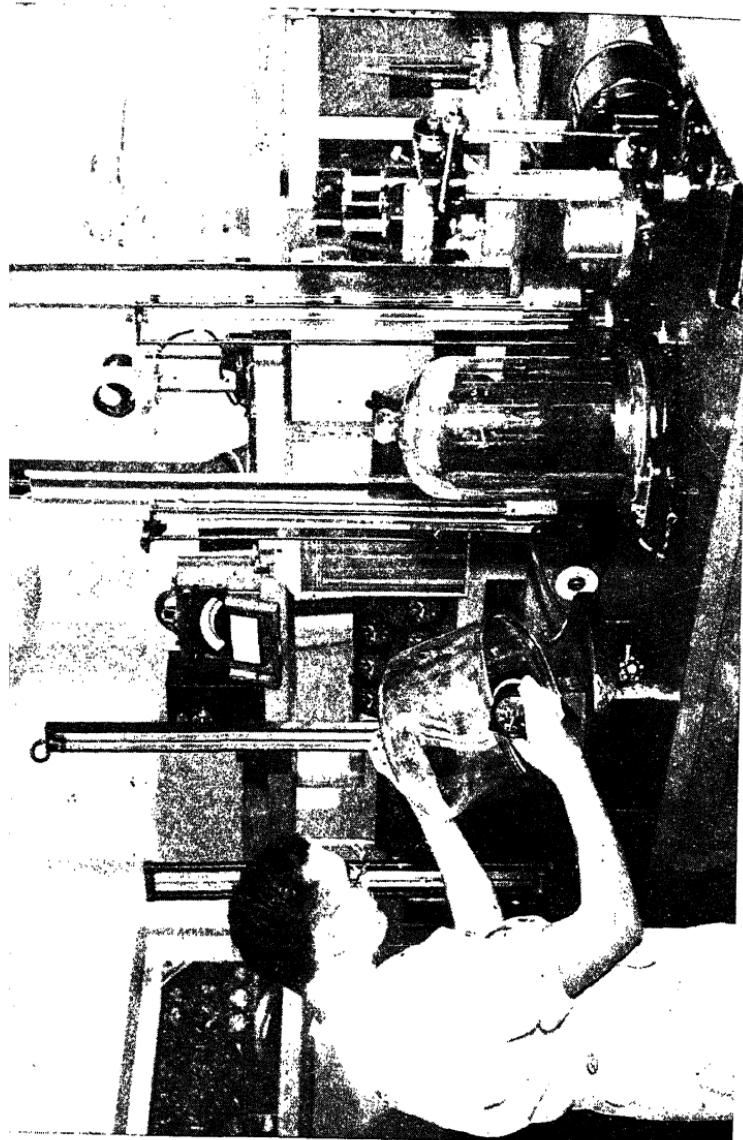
A T.W.A. Instrument Technician Prepares to Check on Altimeter under the Bell Jar After Final Assembly
